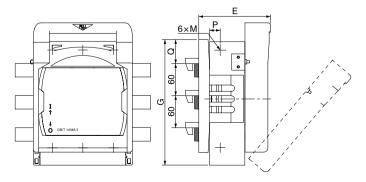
HR17N/D series busbar type installation and outline dimensions drawing
